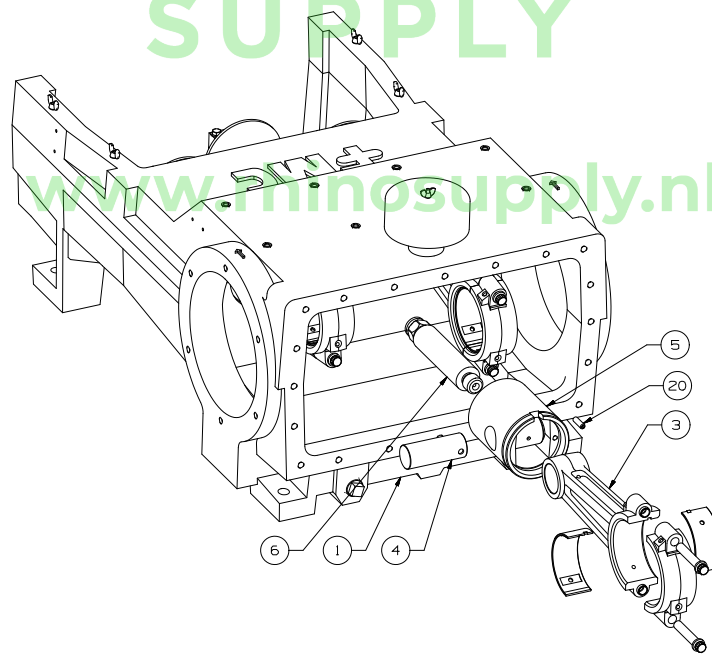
Plunger (Pony) Rod and Crosshead Removal
